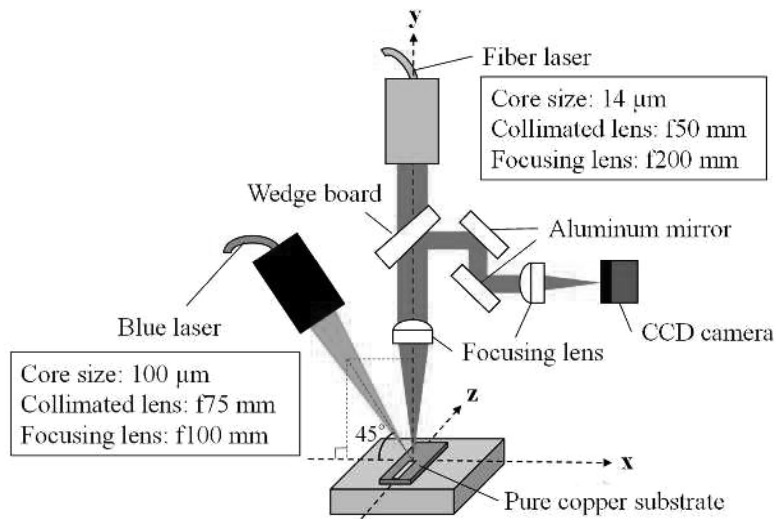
Schematic diagram of experimental setup for pure copper welding with a hybrid laser system using a fiber laser and a blue diode laser
